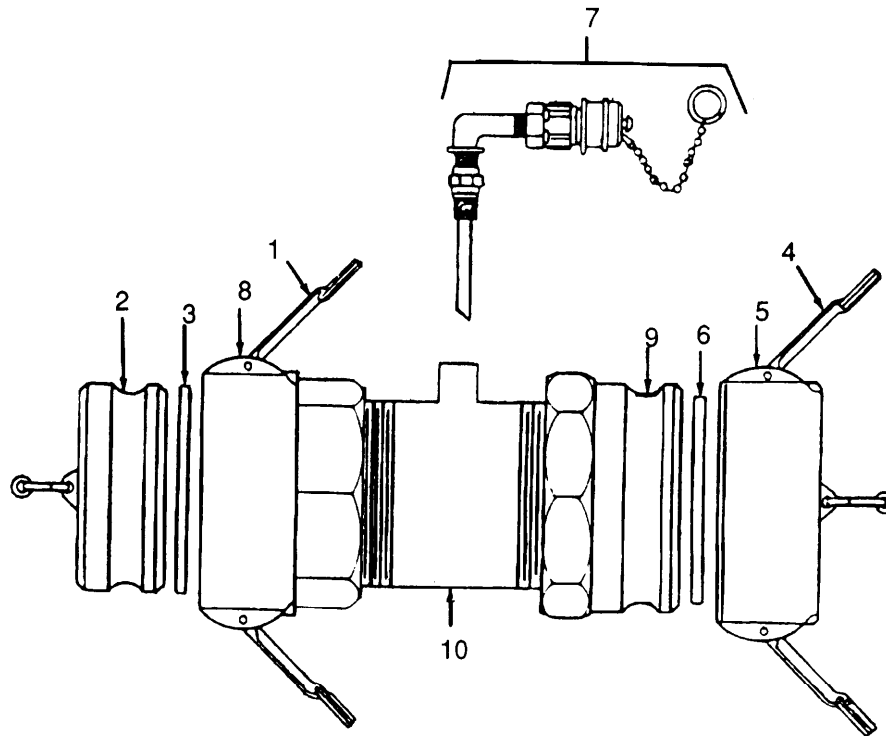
Water Detector Adapter, Disassembly/Reassembly.
